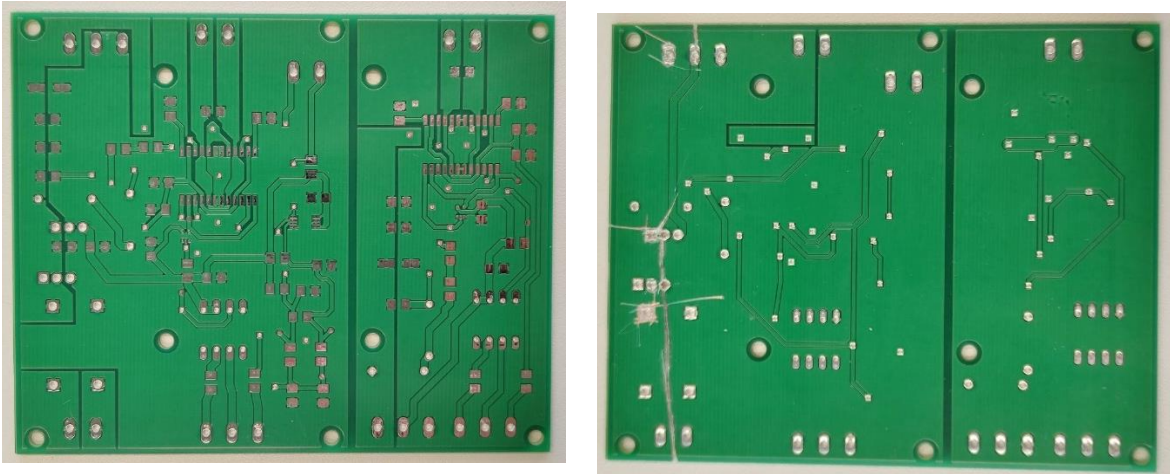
L6206D PCB (Top Layer left and Bot Layer right)
